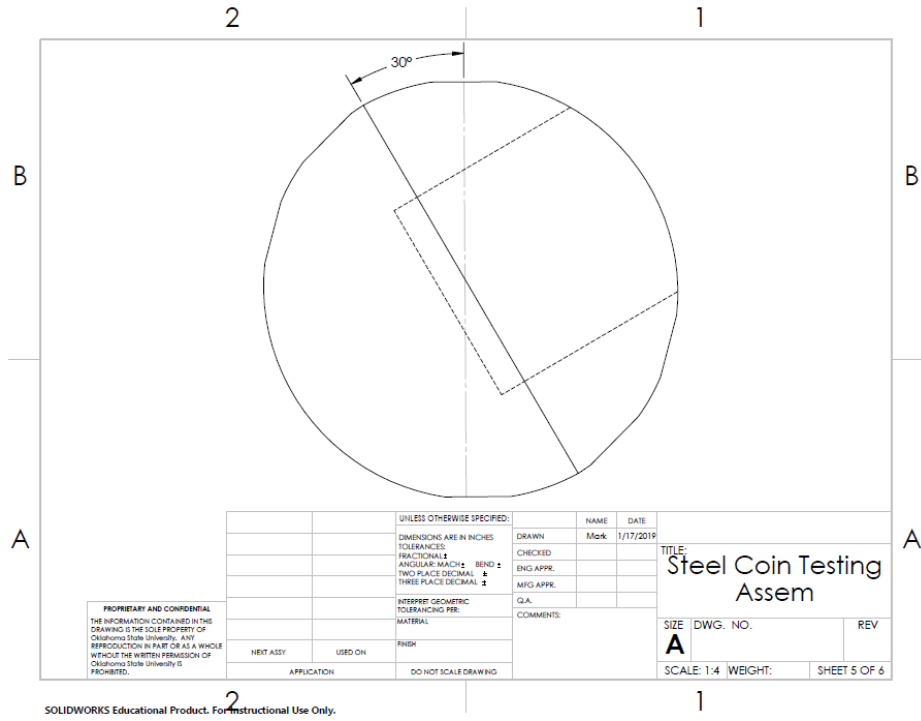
Shear bond test sample holder at 60° from the horizontal.
